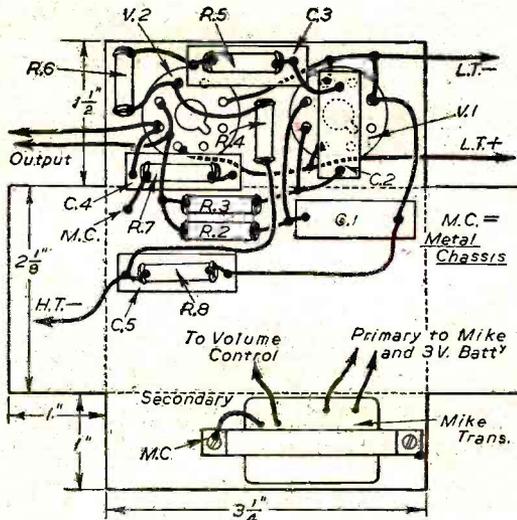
Wiring plan and flat shape of valveholder platform.
